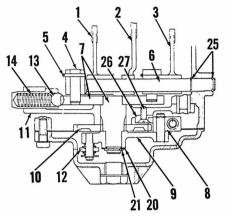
Cross sectional view of the shift assembly. Refer to Fig. 7-25 for leg-
